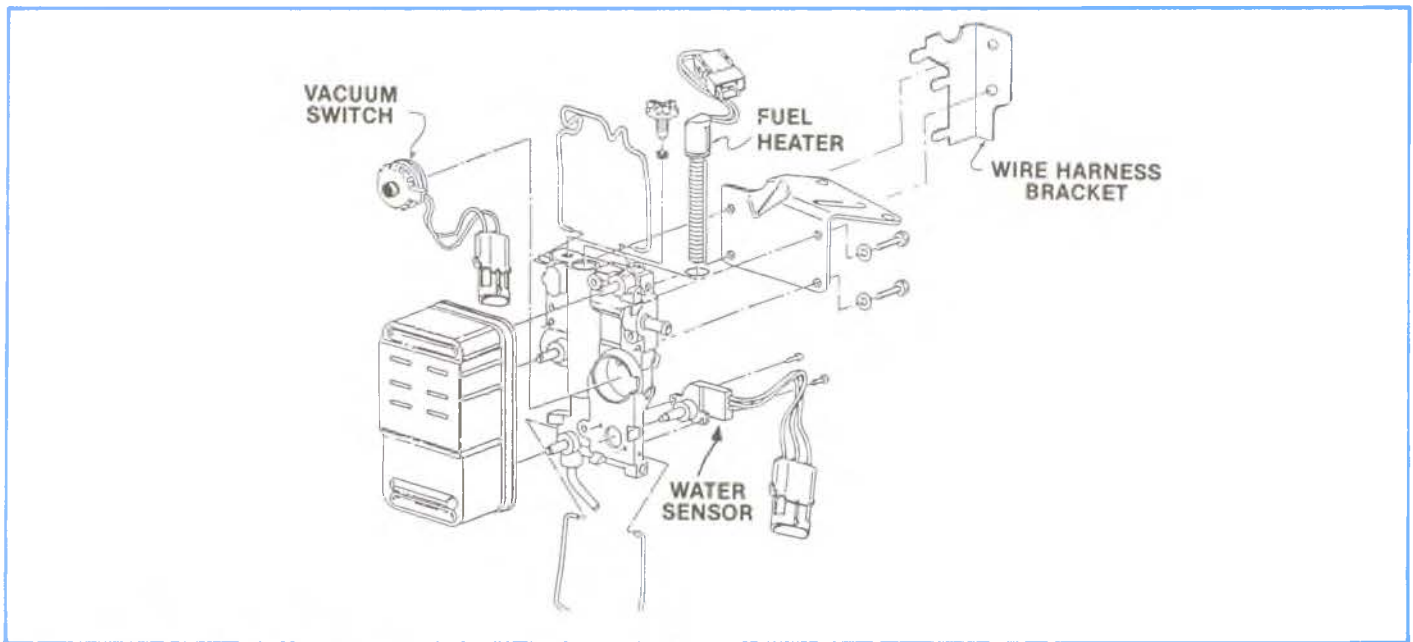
, 1985 Model 80 Filter, Exploded View.
